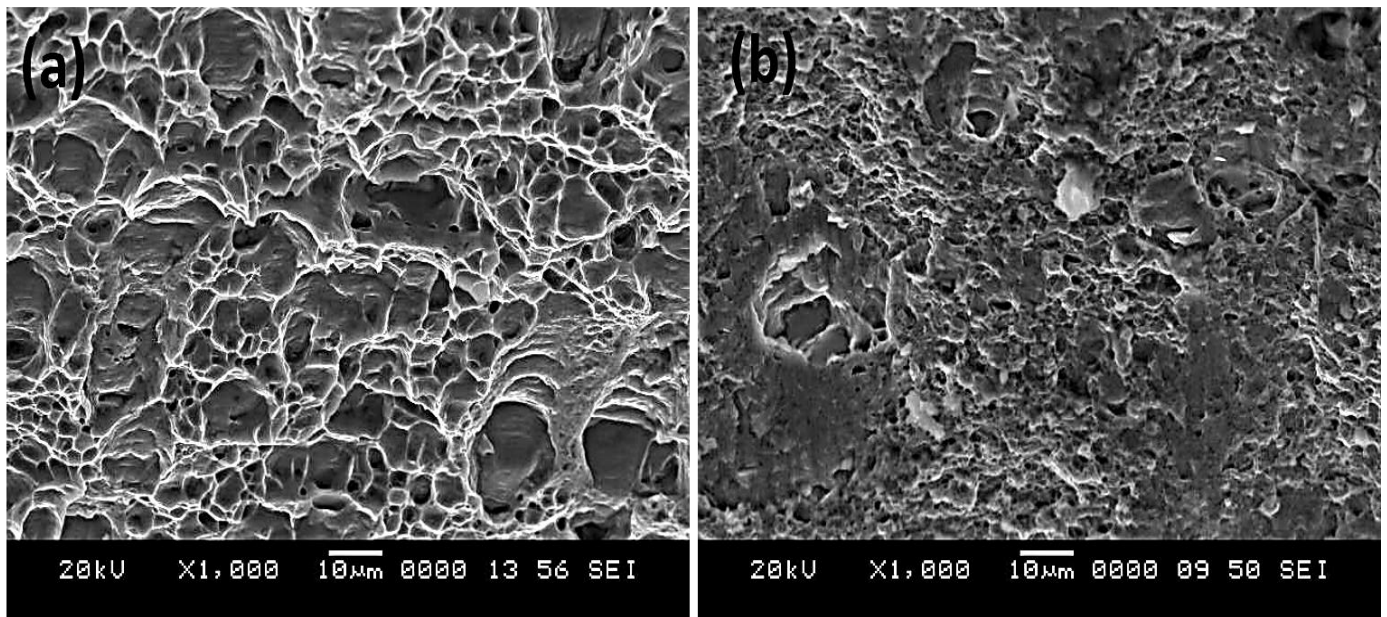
Fractography of fractured specimen in FSWed A5754-H111 and A5083-H111 joint (a) FSW (SZ) and (b) FSW (over-all region)
